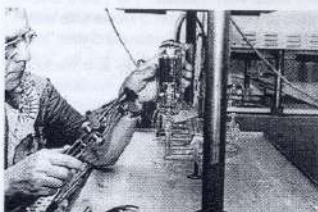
Attaching tube to the vacuum manifold with hand torch.
